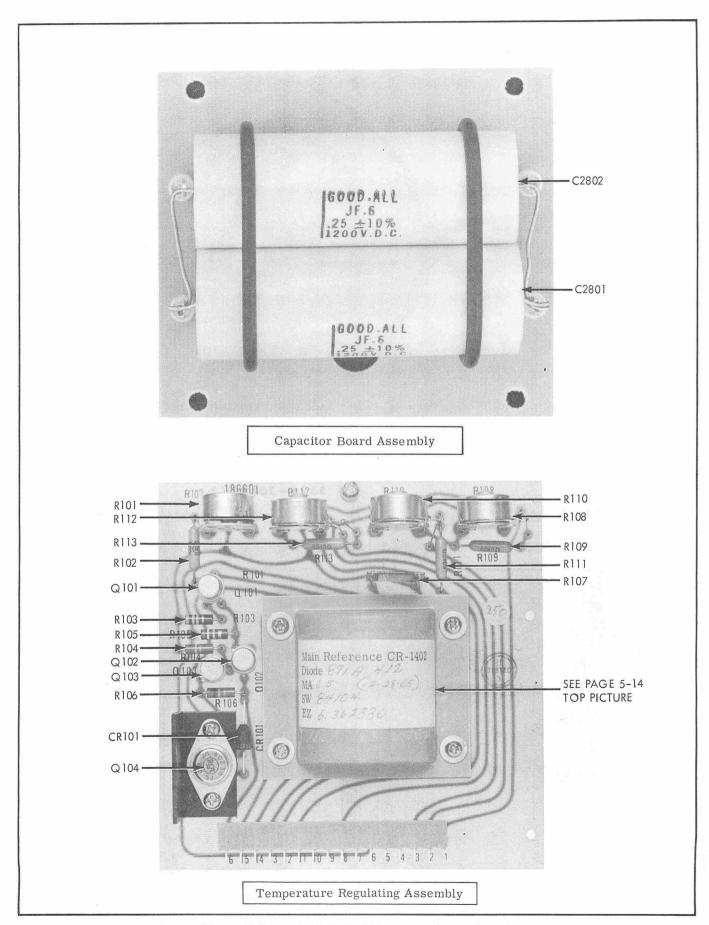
FRONT END ASSEMBLY (Sheet 2 of 4)
